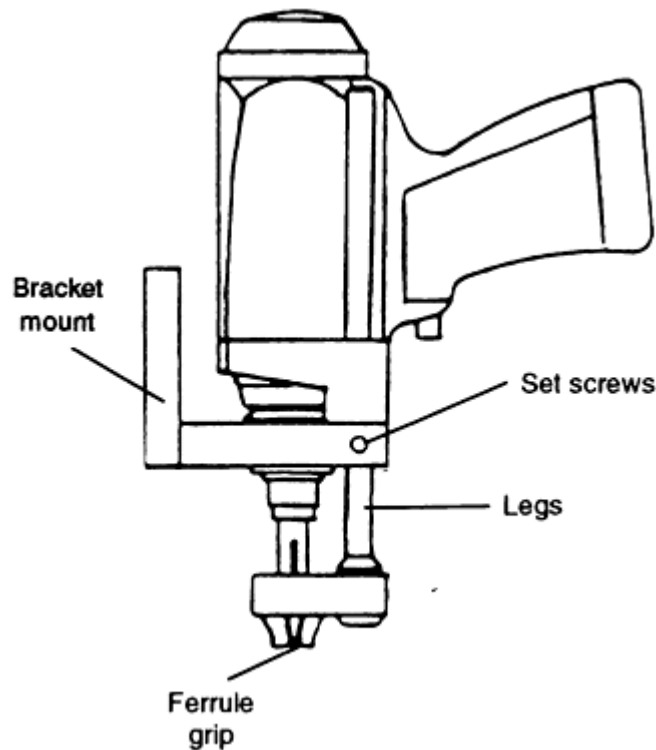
INEXPENSIVE METHOD OF MOUNTING PORTABLE HAND GUN TO MACHINE SLIDE OR DRILL PRESS TO OBTAIN FIXED-POSITION ACCURACY
